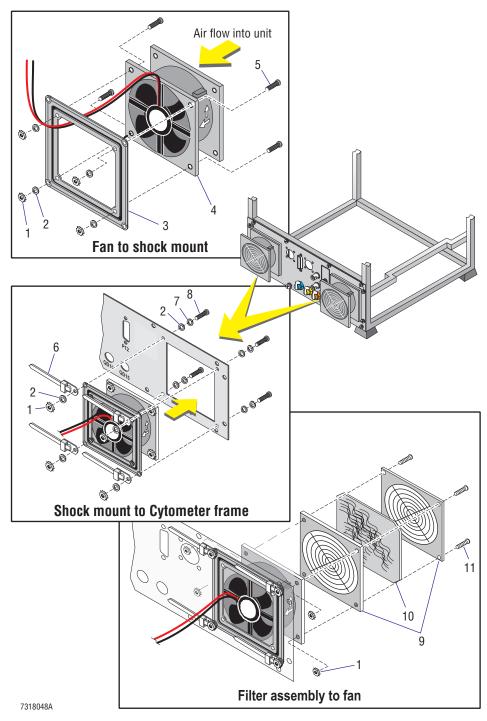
Fan Assembly, Cytometer Rear Panel (See Table 8.2-43)
